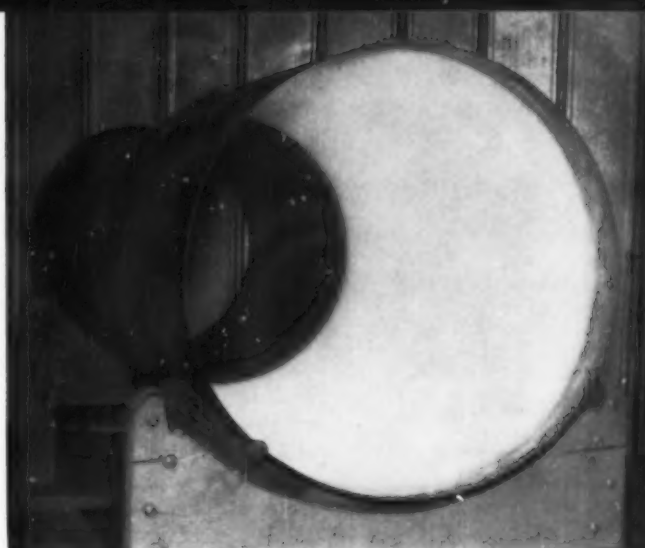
Ramjet Engine Tailpipe Coated With Flame-Sprayed Aluminum Oxide
